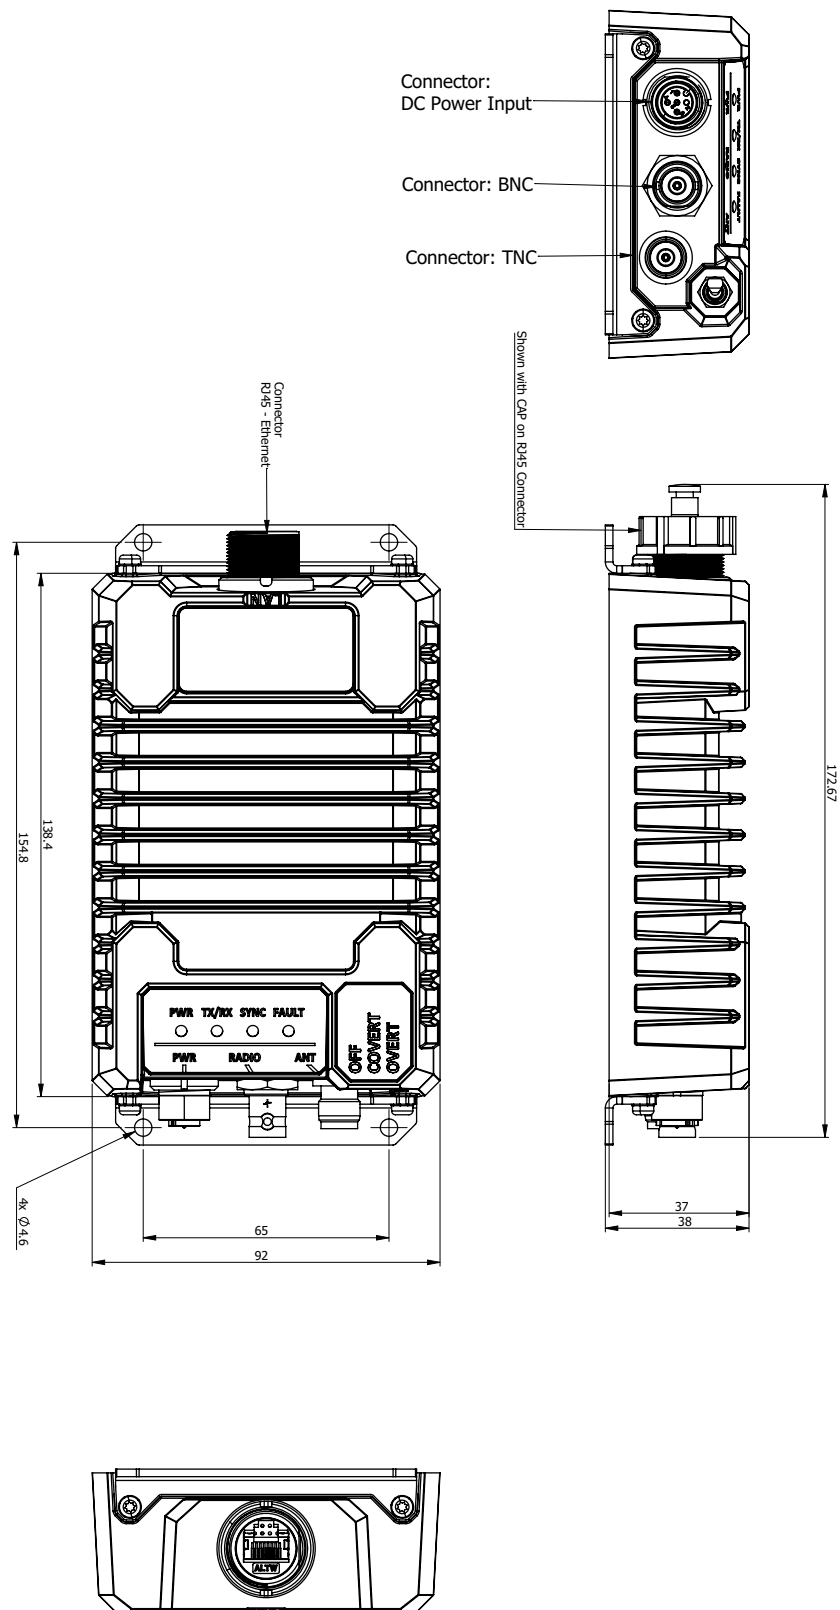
Outline drawing with dimensions, Generic Converter Unit
